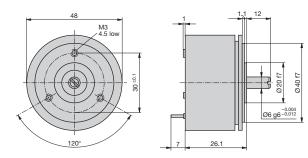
KINAX 3W2 with special drive shaft at front only, Ø 6 mm, length 12 mm.
